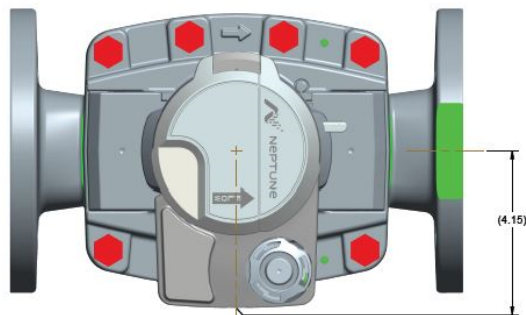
Commercial and Industrial MACH 10®)R900i™ – Top View
